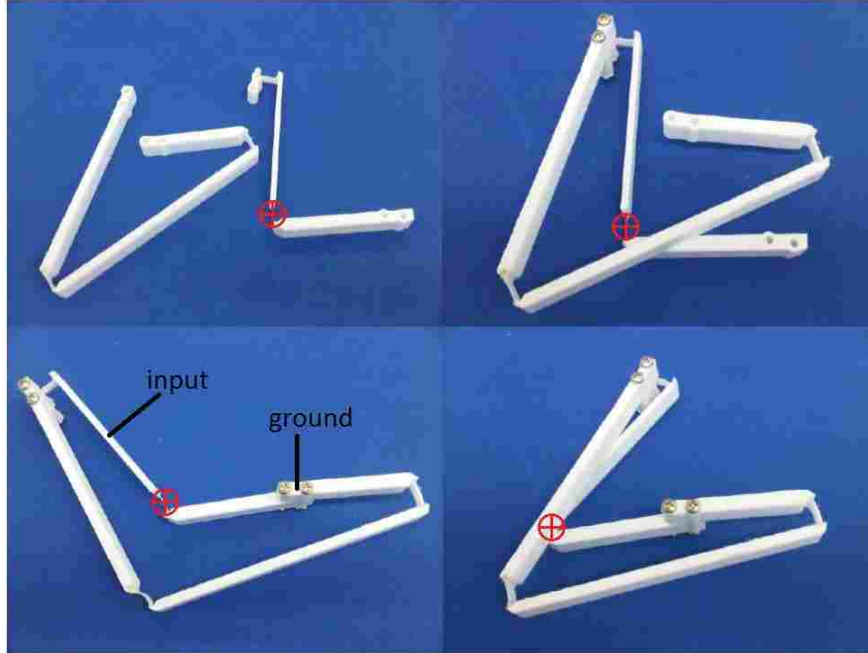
Upper left shows the mechanism as manufactured. Upper right shows the partially assembled mechanism before the preload is applied. The lower pictures show the fully assembled mechanism at two deflected positions. Note that the deflected positions are maintained without use of fasteners or restraints, indicating balanced behavior in these positions.
